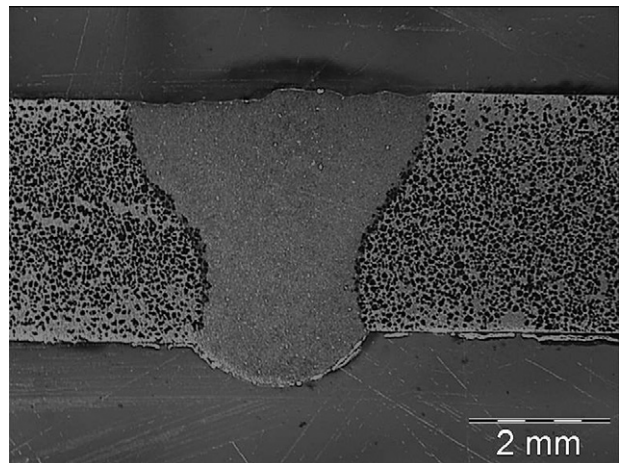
Weld profile of aluminium alloy in butt configuration: laser power, 3.8 kW; speed, 1.92 m/min; spot separation, 0.49 mm; sheet thickness, 4.0 mm.
